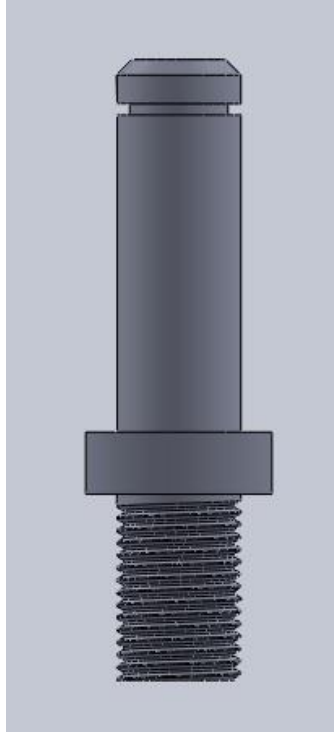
Shows the new stainless steel 304 idle pulley shaft design.
